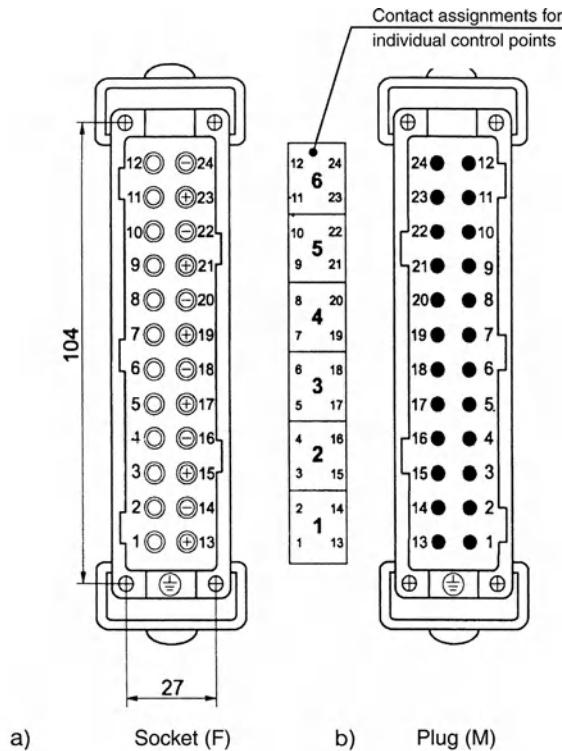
reproduces an illustration from DIN 16765 (type B: load and signal lines in one plug/socket for max. six control points).
